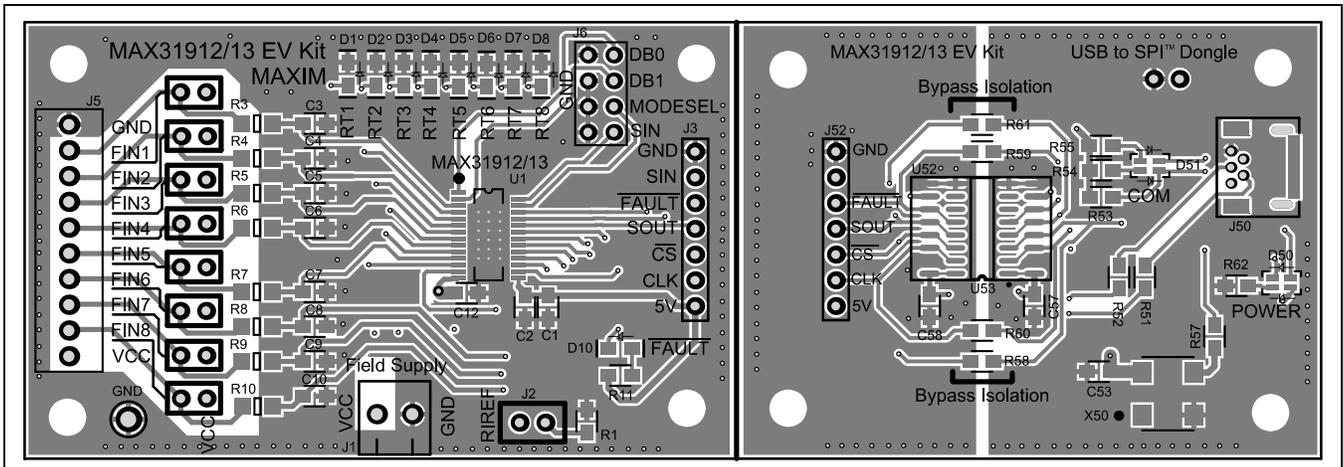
MAX31912/MAX31913 EV Kit PCB Layout—Top
